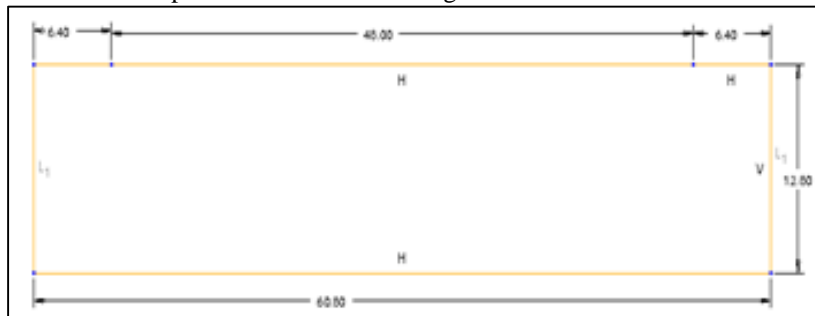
ASTM – D790 Flexural Test Specimen Details.
